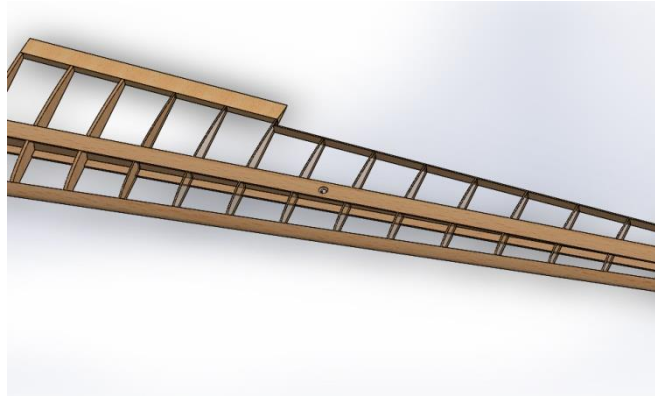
CAD damaged wing model with hole on the center region of the beam.
